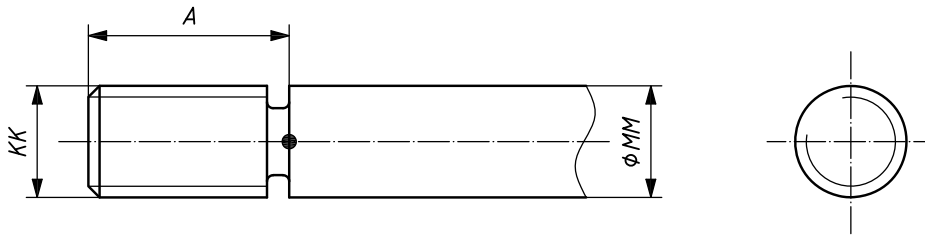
Male thread without shoulder for hydraulic cylinder piston rods
